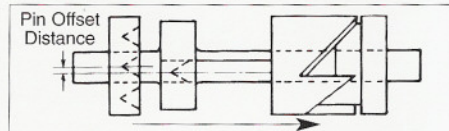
shows piston location after air valve has allowed air in. 95% of index is complete. Pin center line slightly offset from hole center line.
